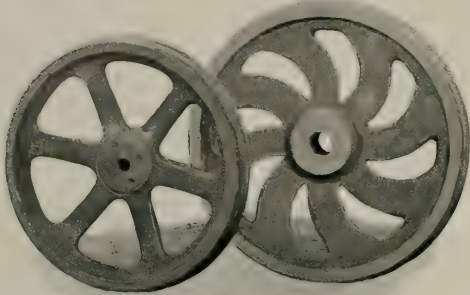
33-IN. HORSE CAR AND 33-IN. MOTOR CAR WHEELS.
